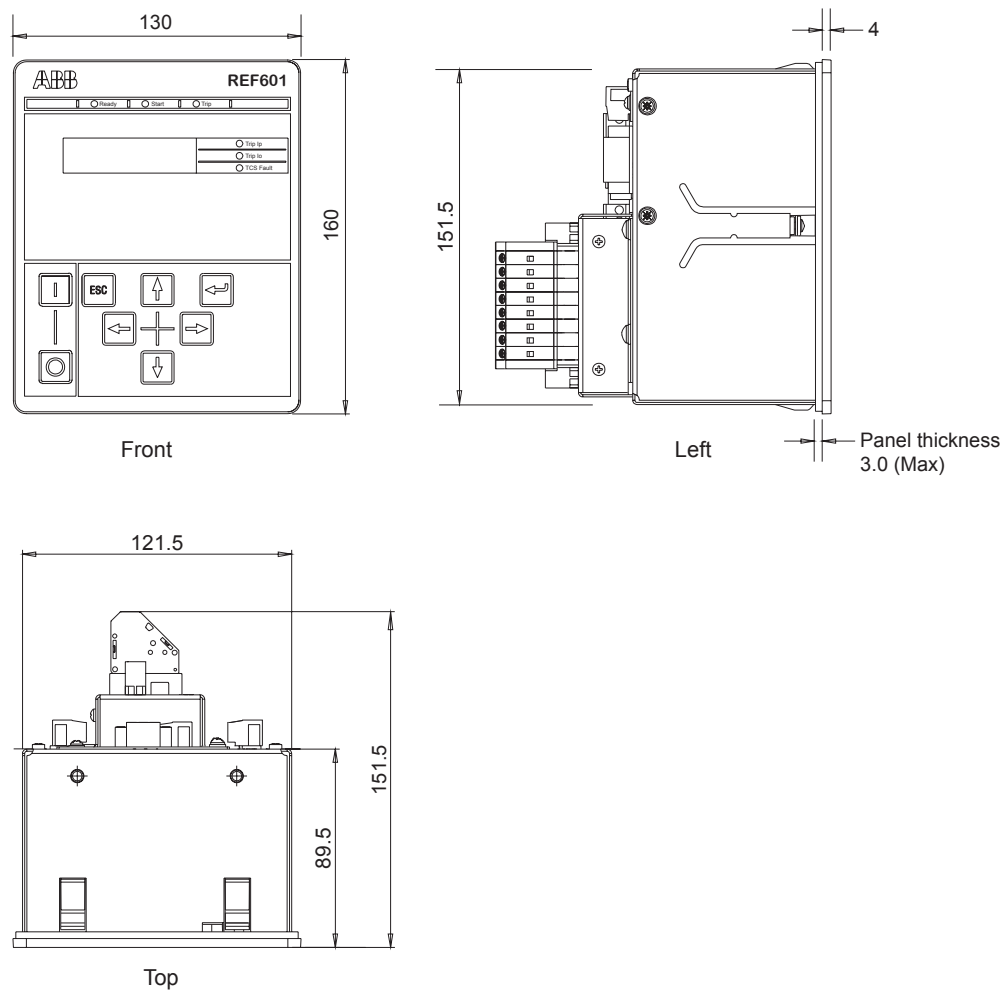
Dimension of REF601/REJ601 - Flush mounting
